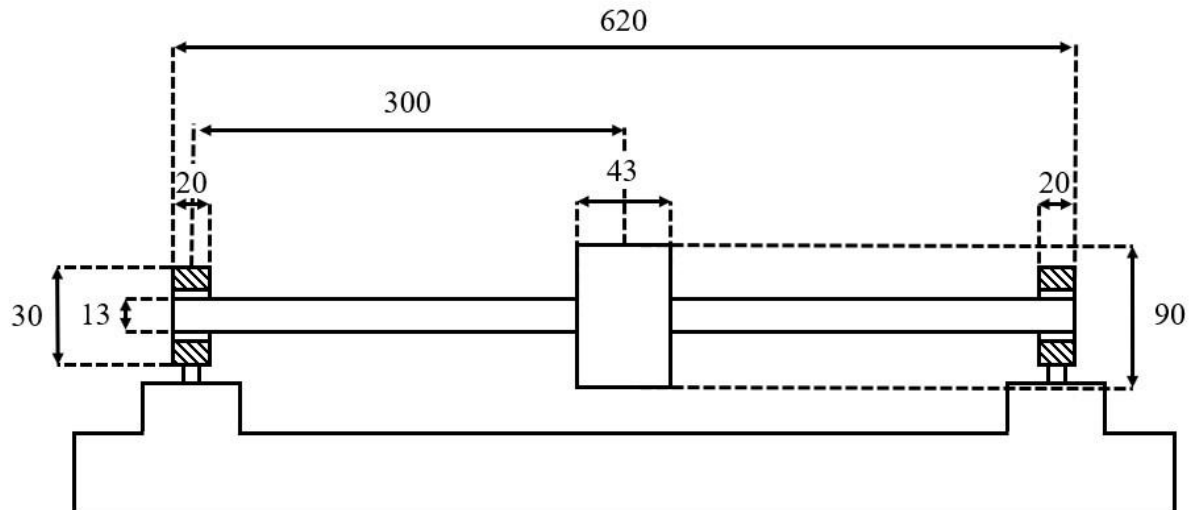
Jeffcott rotor model used (dimensions in millimeters)
